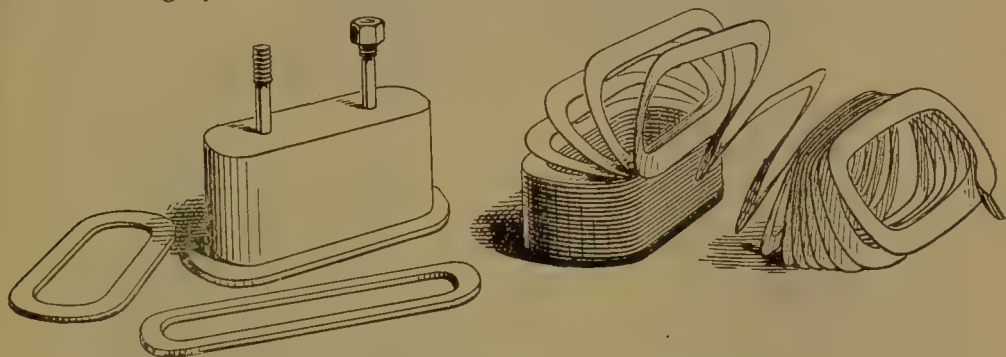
Shunt Field Coils for Large Multipolar Machine.
